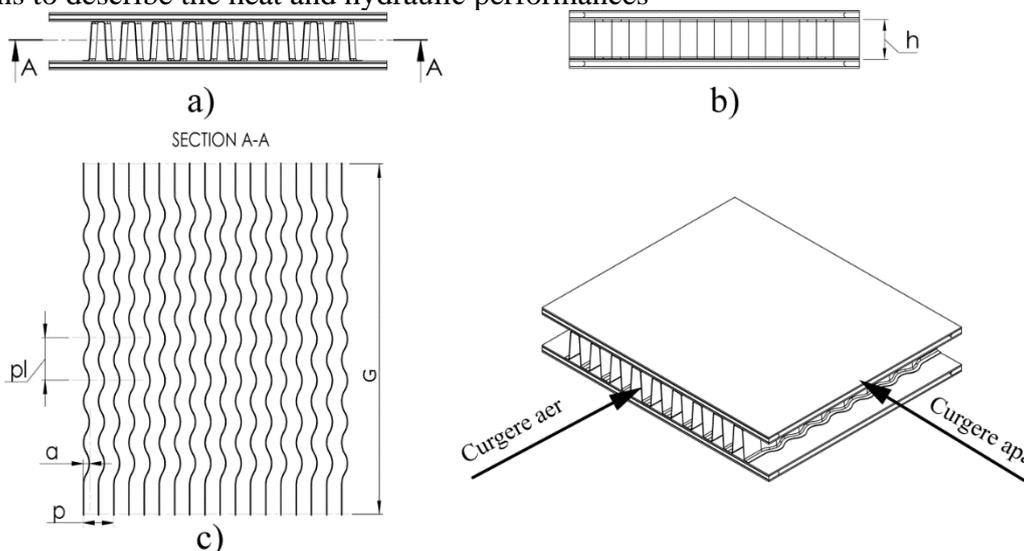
Air structure of the test heat exchangers: a) frontal section, b) lateral section, c) fin section
